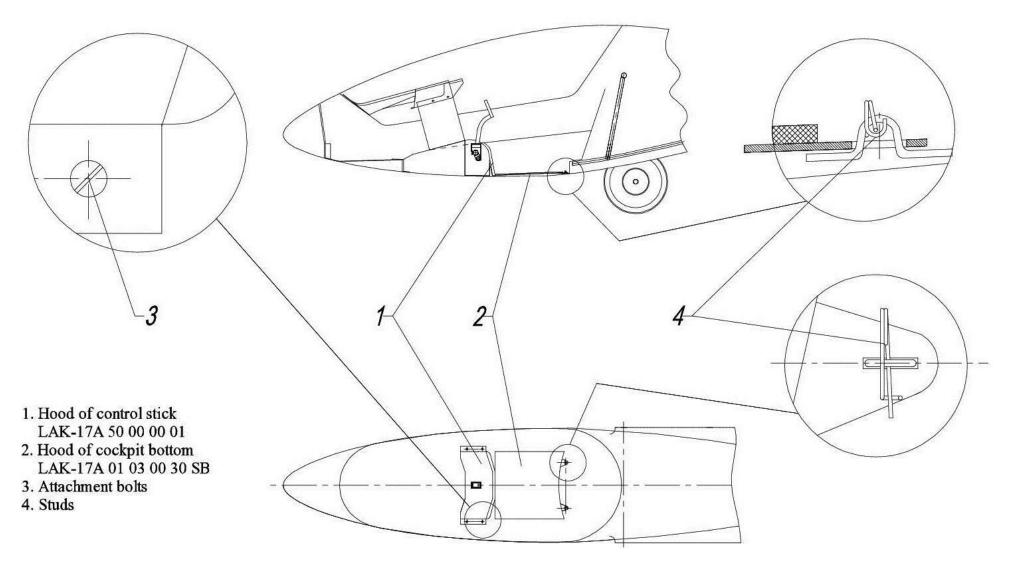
01. Taking out and putting in of cockpit floor
